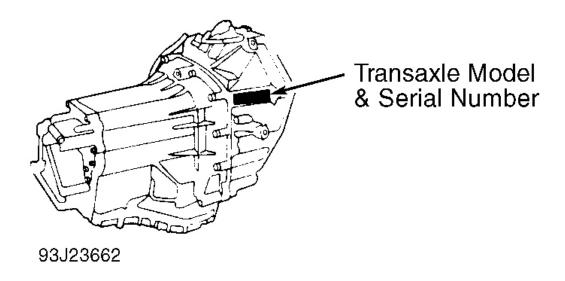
Locating Transaxle Model & Serial Number Courtesy of AMERICAN HONDA MOTOR CO., INC.
